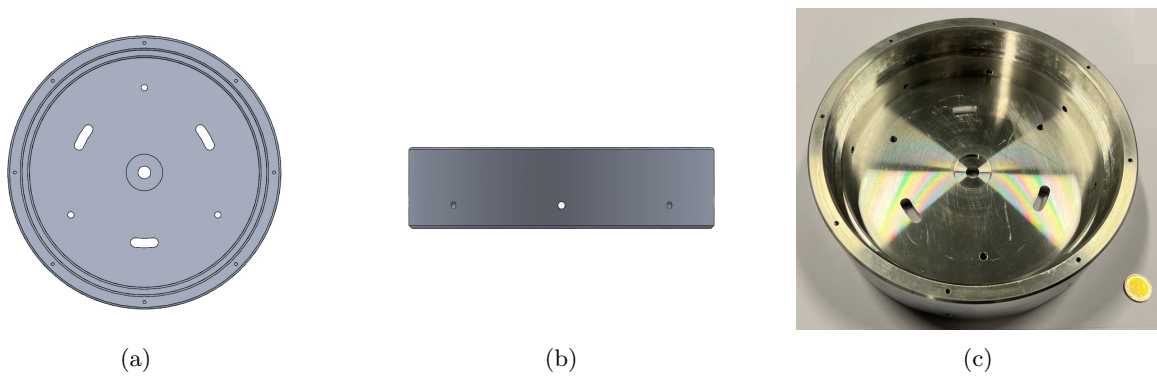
Different views of the support of the stator: (a) top view (b) side view (c) real view.
